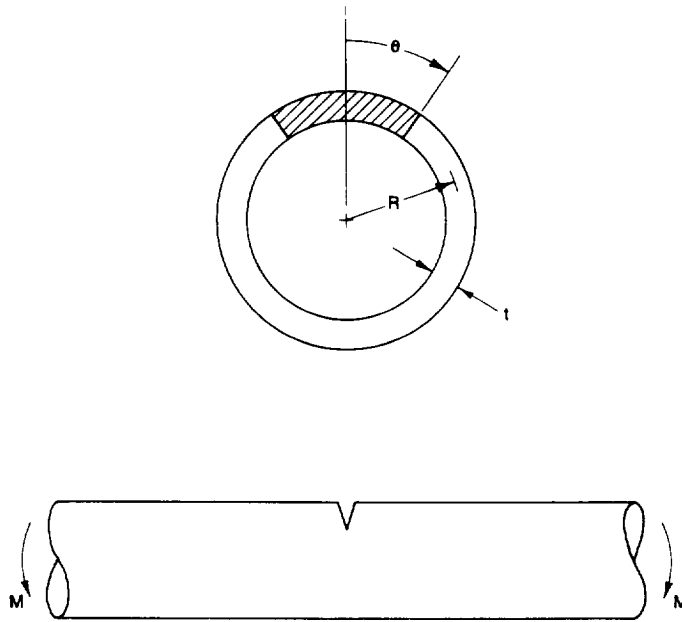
A pipe with a circumferential through-wall crack subject to pure bending.
